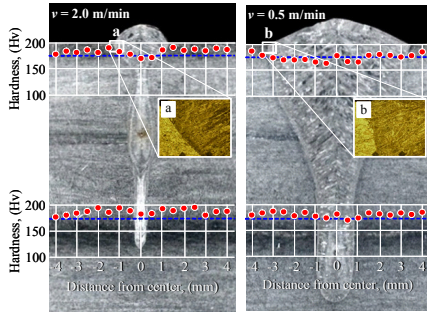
Bead appearance and cross section in butt welding for STS 316L at P = 5 kW
